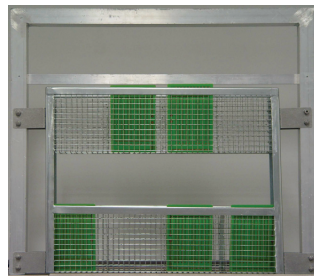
Holder for Bare Board Used to Test for Cleanliness
